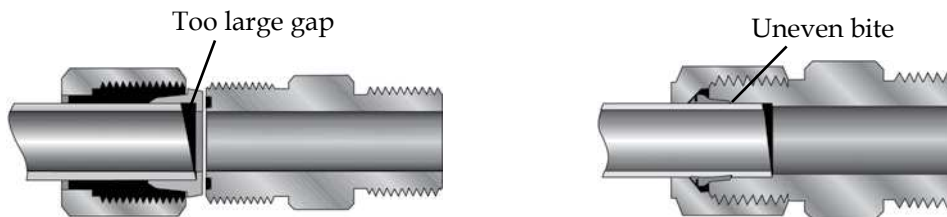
Sleeve attachment with ferrule assemblies. Adapted from: Assembly/Installation section of [64].
